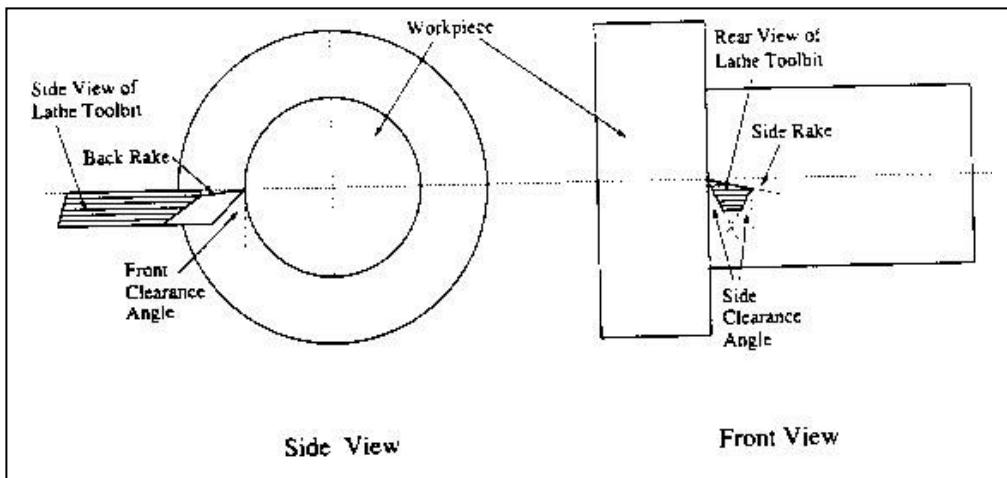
Rake and Clearance Angles of the Lathe Tool Bit.
